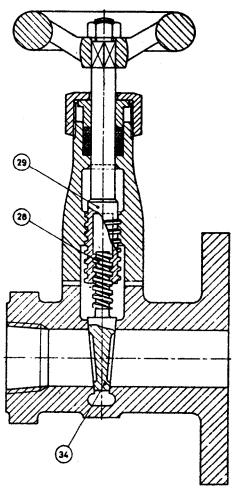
Inside Screw, Solid Wedge, Rising Spindle, Rising Stem
